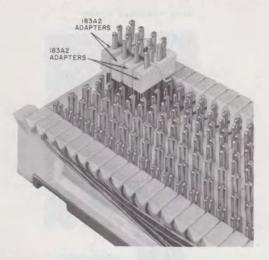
Typical Installation of 183A2 Adapters on 66B-Type Connecting Block
